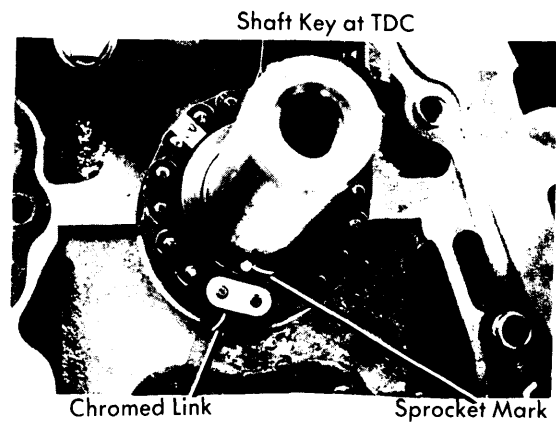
Aligning Crankshaft Sprocket & Timing Chain
